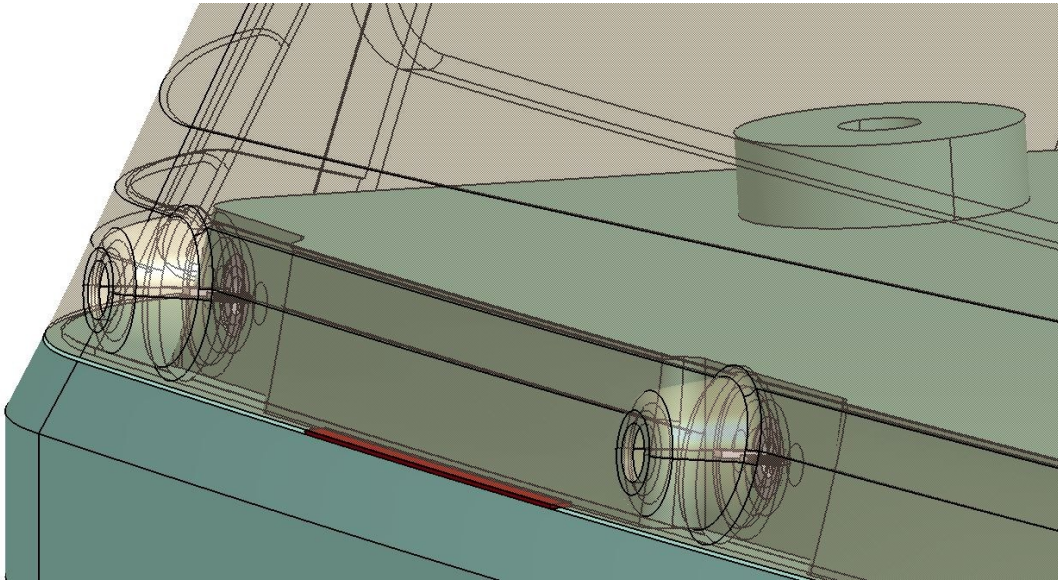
Detail view of pad, floating Keensert, and datum used
